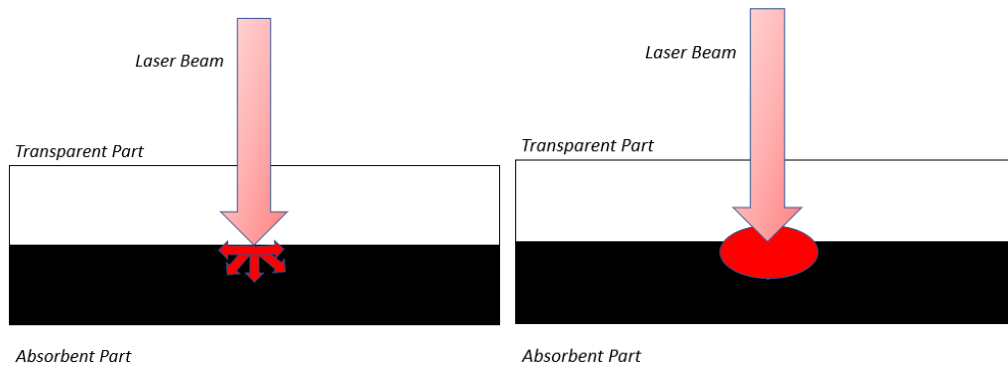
Through Transmission Laser Welding Process. a) Material absorbs the radiation; b) Welding seam
